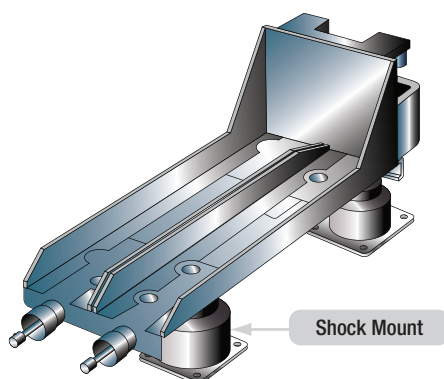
A shock mounted equipment rack is often used to install avionics.
